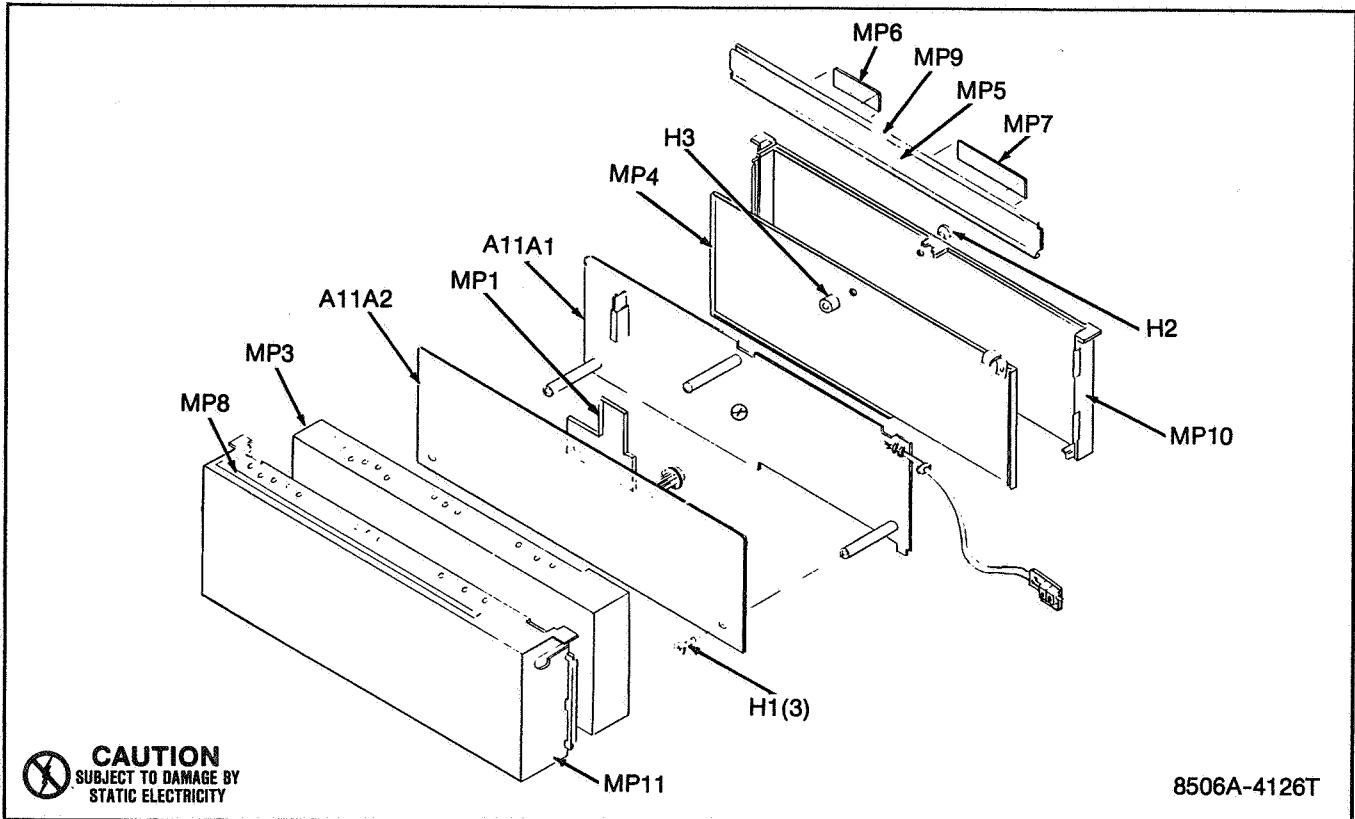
A11 Thermal True-RMS Converter PCB Assembly
